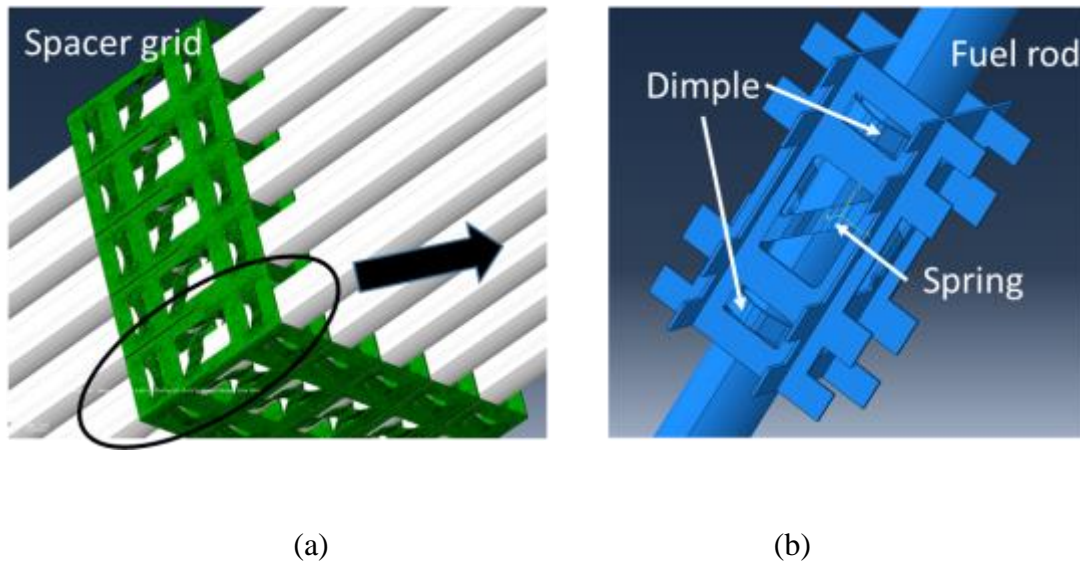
PWR fuel assembly with the spacer grid (a) bundles (b) a single cell [2]
